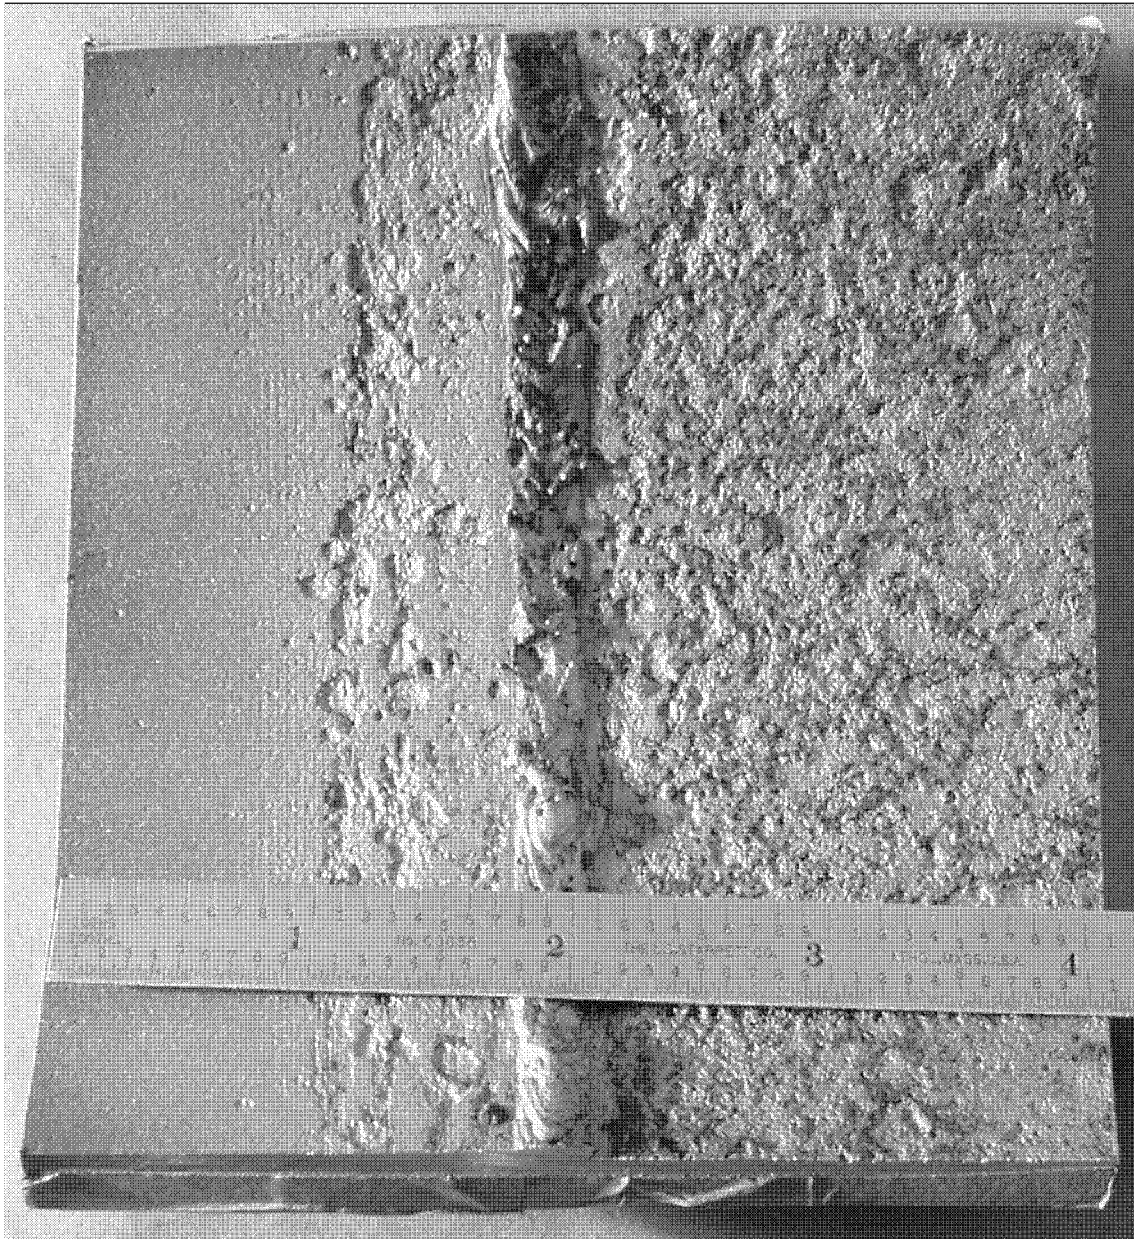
Inside view of pipe sample looking from straight pipe toward the elbow (as received condition).
